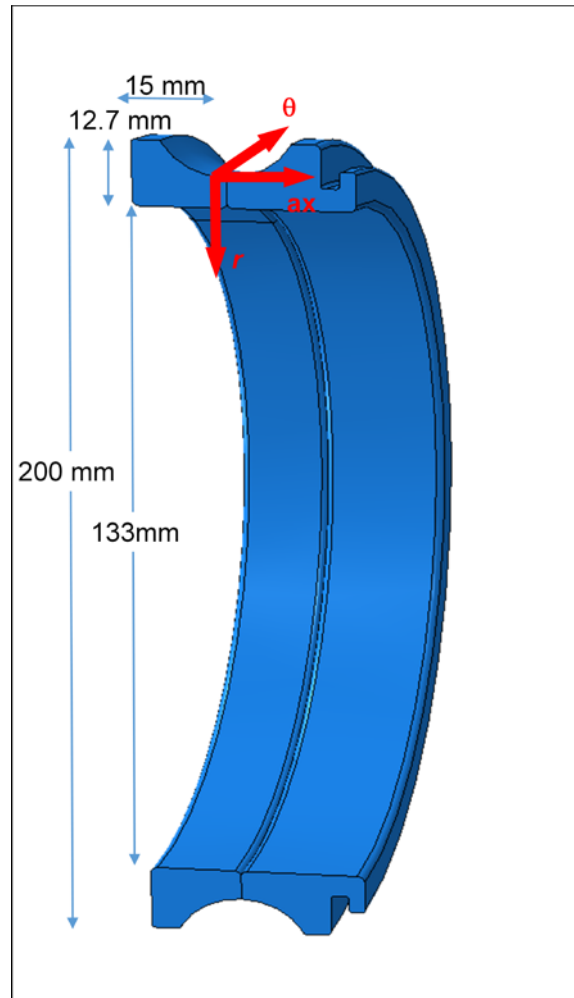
Showing basic dimensions of the bearing and the radial-axial cross section with the three components of residual stress
